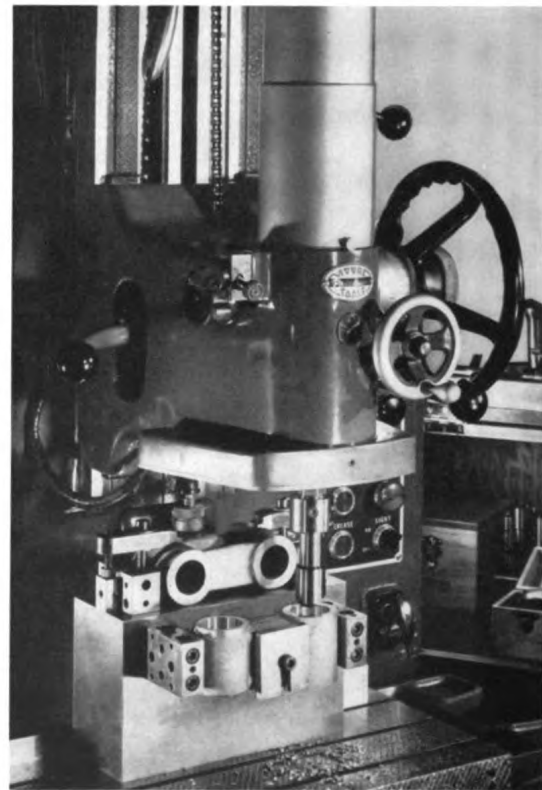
In this Jig Borer setup, a simple fixture is used which provides a milling position and a boring position for machining the part illustrated in Fig. 307.
